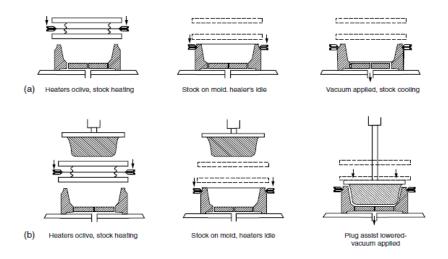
(a) Straight vacuum forming mold. (b) Plug assisted vacuum forming mold (Source: Advance Thermoforming, Sven Engelmann)
